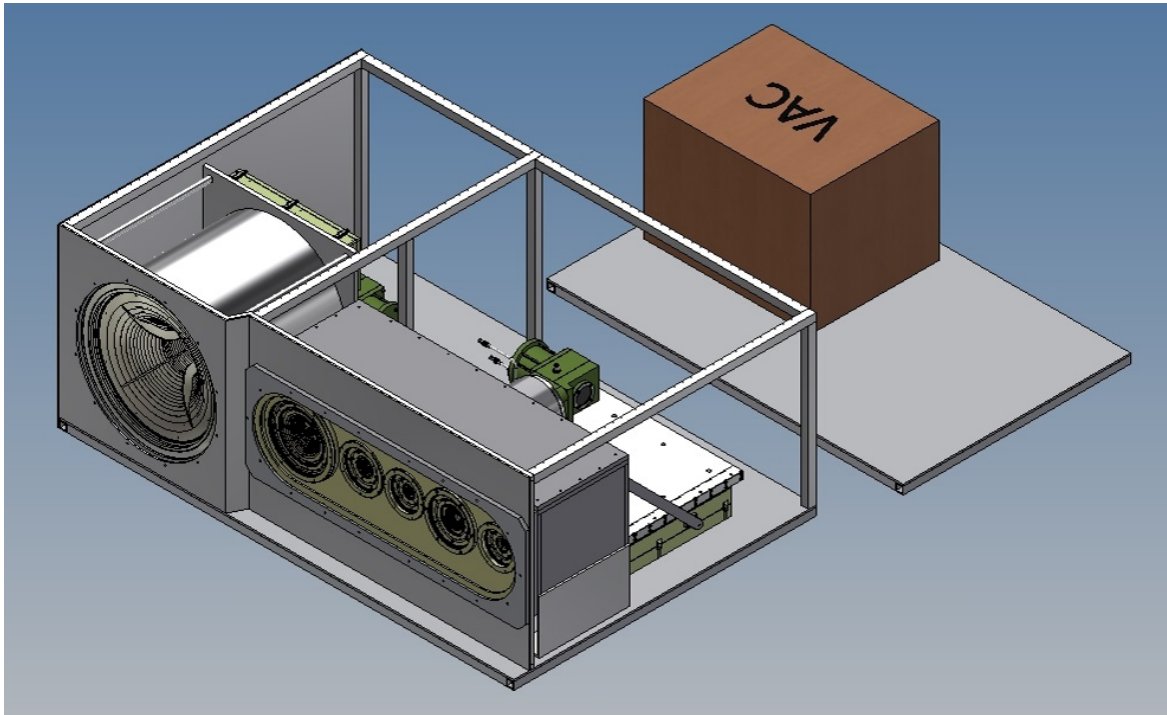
Front End subsystem enclosure, opened to show cryostats and IRD assembly.
